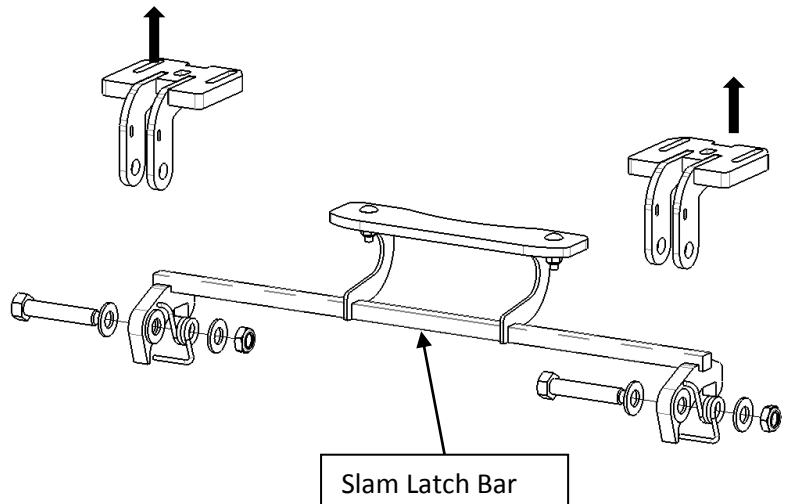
Slam Latch Hanger Assembly Removal (driver's side shown).
